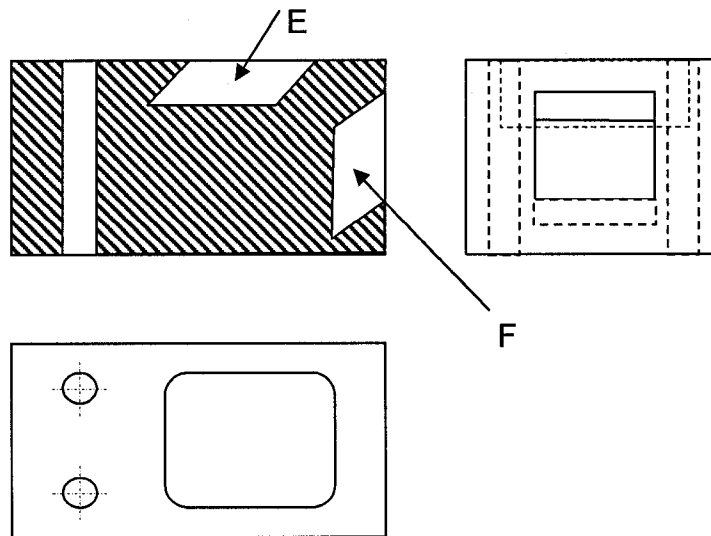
A part that Needs 5-Axis Machine to be Manufactured.
